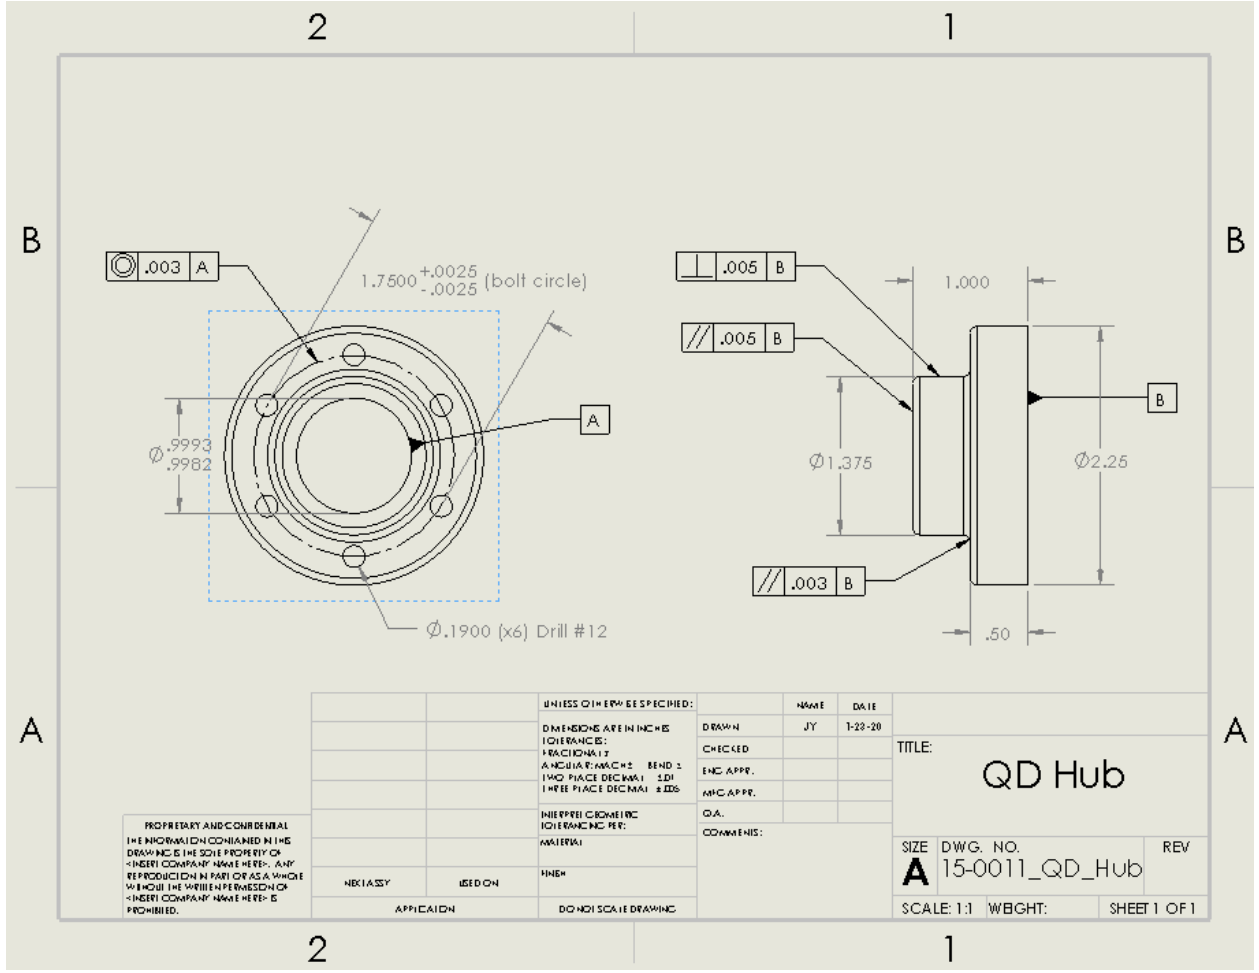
This hub will be manufactured if a hub with the appropriate dimensions cannot be found online.
